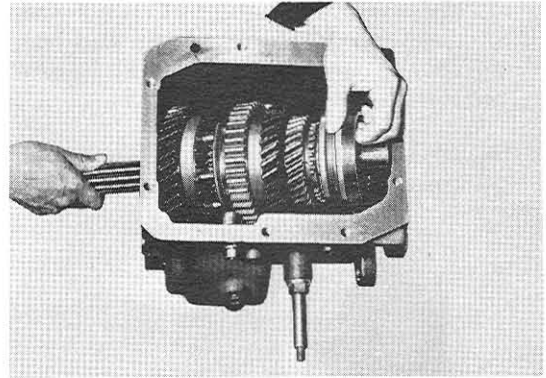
Removing Output V5068 Shaft & Gear Assembly
